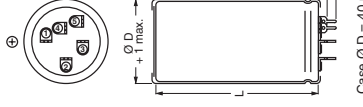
Printed wiring pin version Case Ø D = 40 mm
